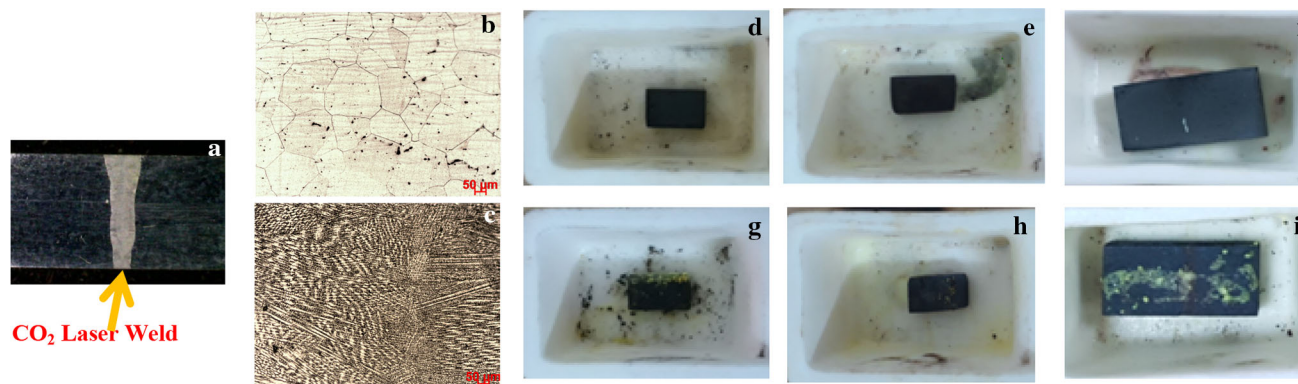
a Cross-sectional macroimage of laser weldment in as-welded condition; microstructure of b base metal A-286, c weld zone; air-oxidized samples of d base metal, e weld zone, f weldment; hot-corroded samples of g base metal A-286, h weld zone i weldment
